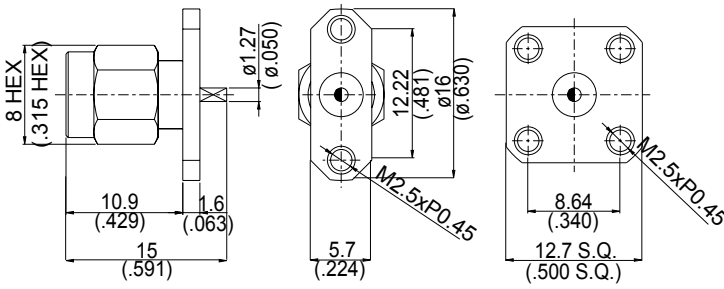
2-hole flange Fig. 3-2:square flange
